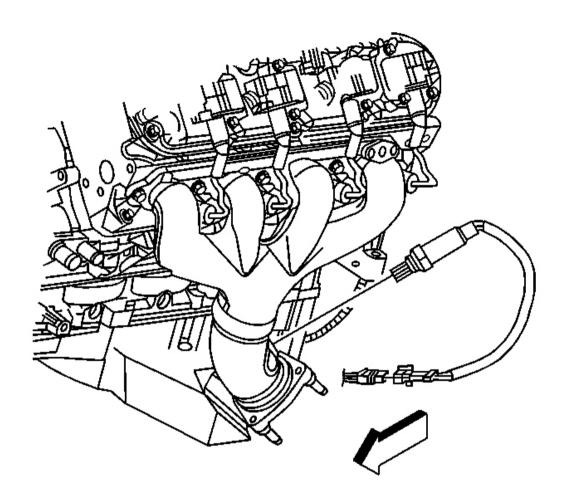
Oxygen Sensor Electrical Connector Courtesy of GENERAL MOTORS CORP.
